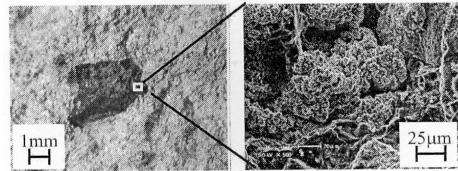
Oxide inclusion appeared on fracture surface [1].
